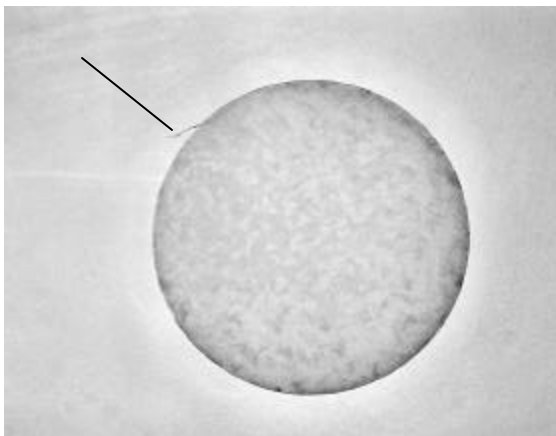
(Left) Planar section through the rivet shank of lever 31, showing a crack extending into the arm material (arrowed). Magnification X 7.5
